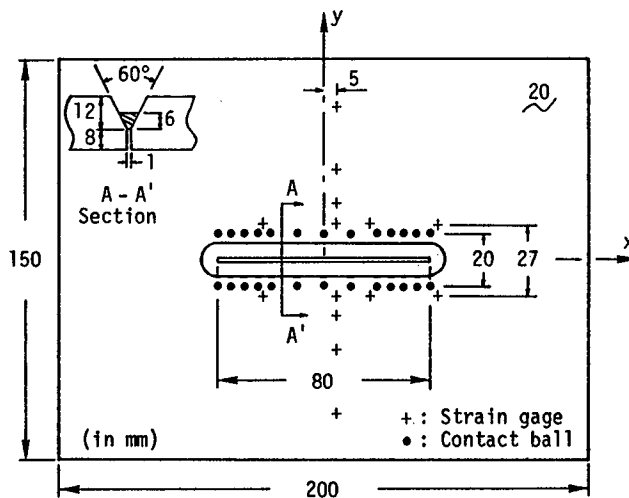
Slit weld specimen and location of strain gages and contact balls
